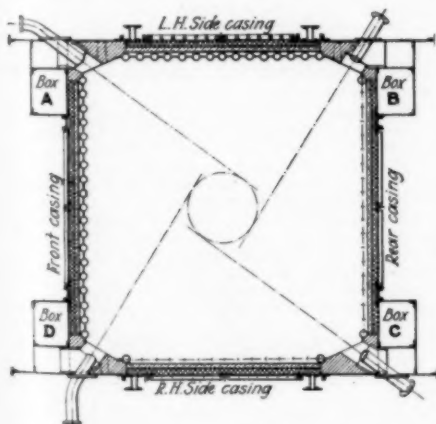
Section Plan of Combustion Chamber of New Steam Generator
